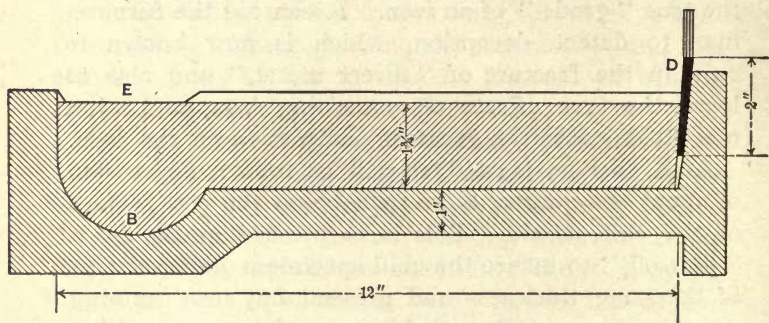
LONGITUDINAL SECTION OF CHILL PIG MOULD.
